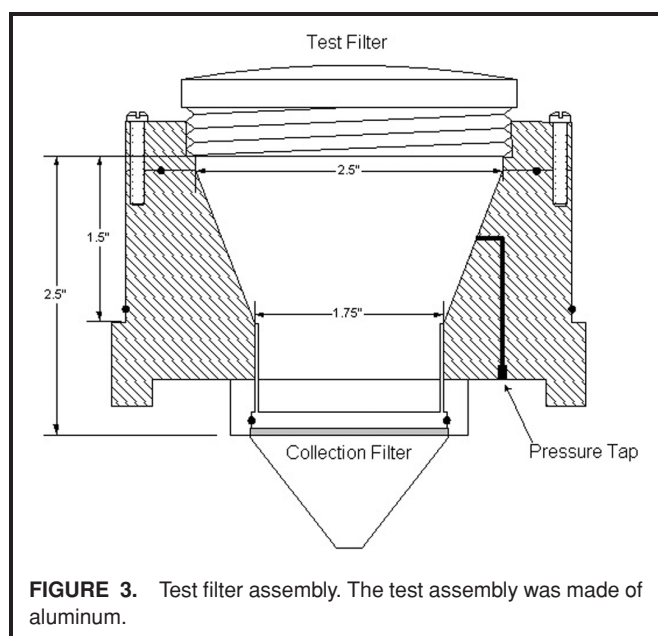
Test filter assembly. The test assembly was made of aluminum.
